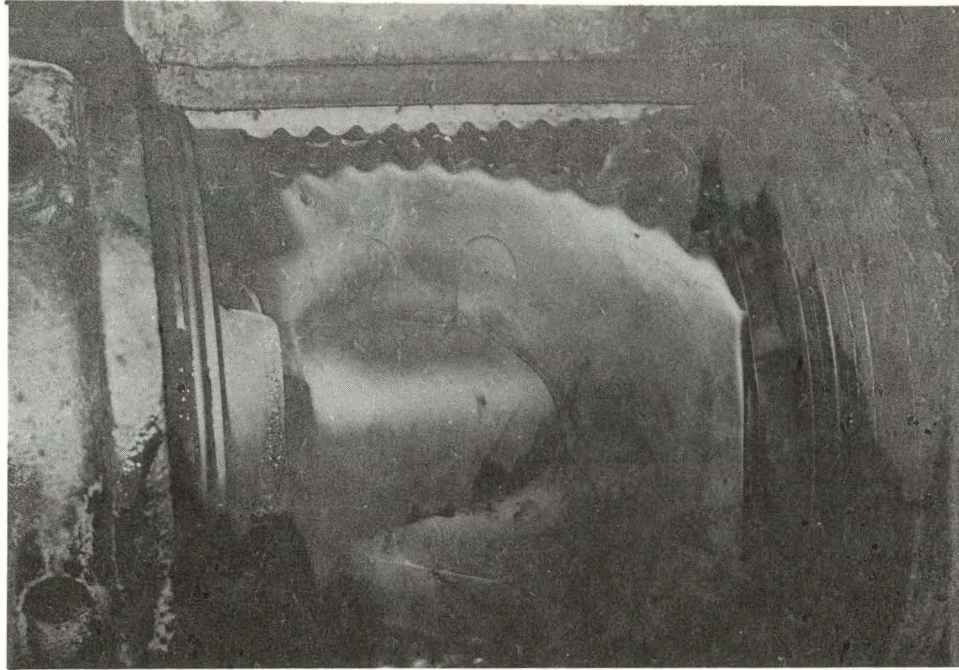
WORN CONDITION OF ROTOR PLATE AND LINER BARS
